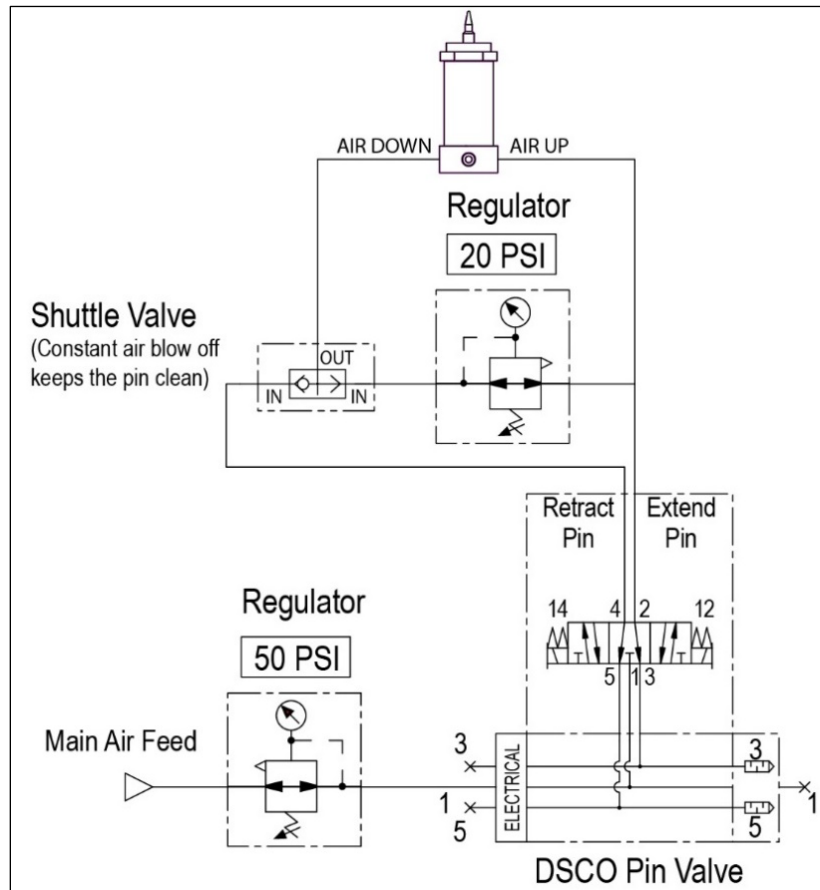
Pneumatic Connection Diagram for VeriFast™ IA Weld Body with Retractable Pin, using DSCO Valve (Not applicable to Clamp Mount Assembly)
